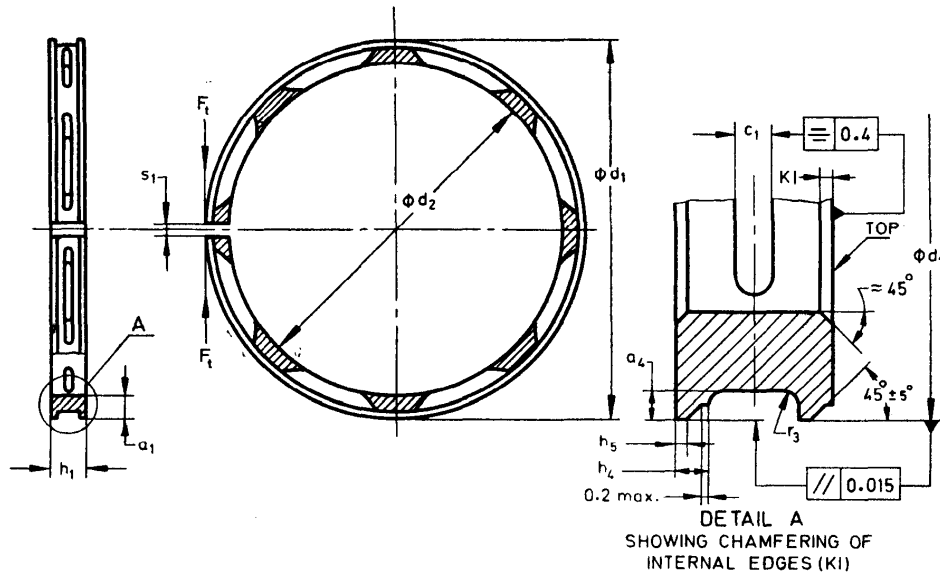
DOUBLE BEVELLED SLOTTED OIL CONTROL RING (G-RING)
